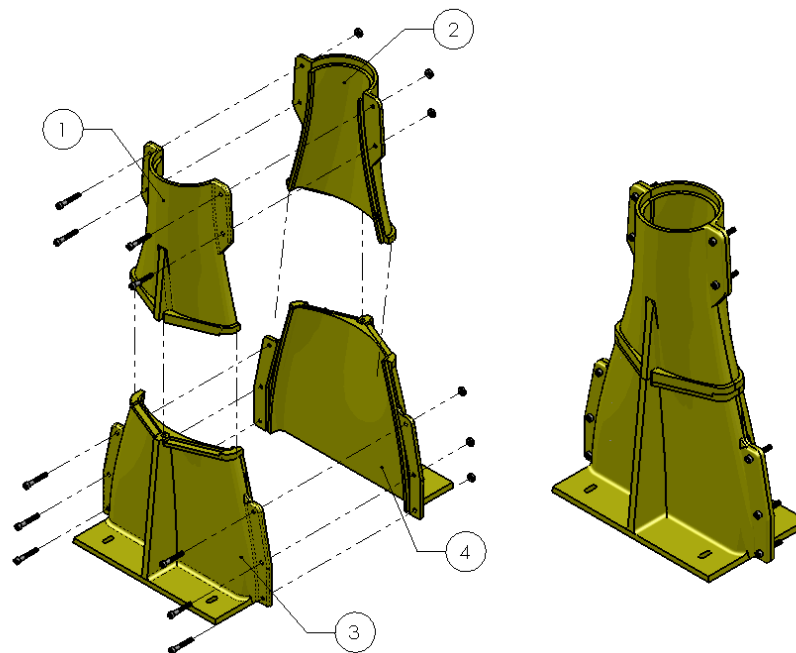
Air Duct Reducer (T301) shown in an exploded view and in its assembled form. Washers are not shown for simplicity.
